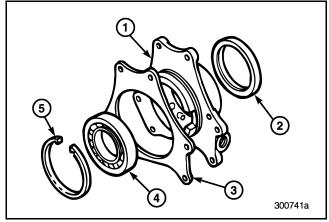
Exploded View of Rear Mainshaft Bearing Cover
